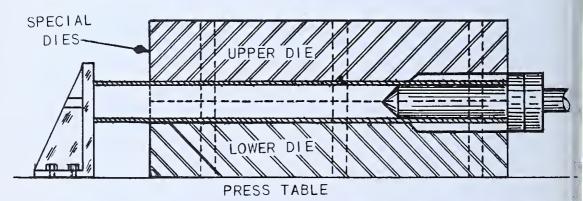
Cross Section of Stay Tube Held in Dies for Up-setting
